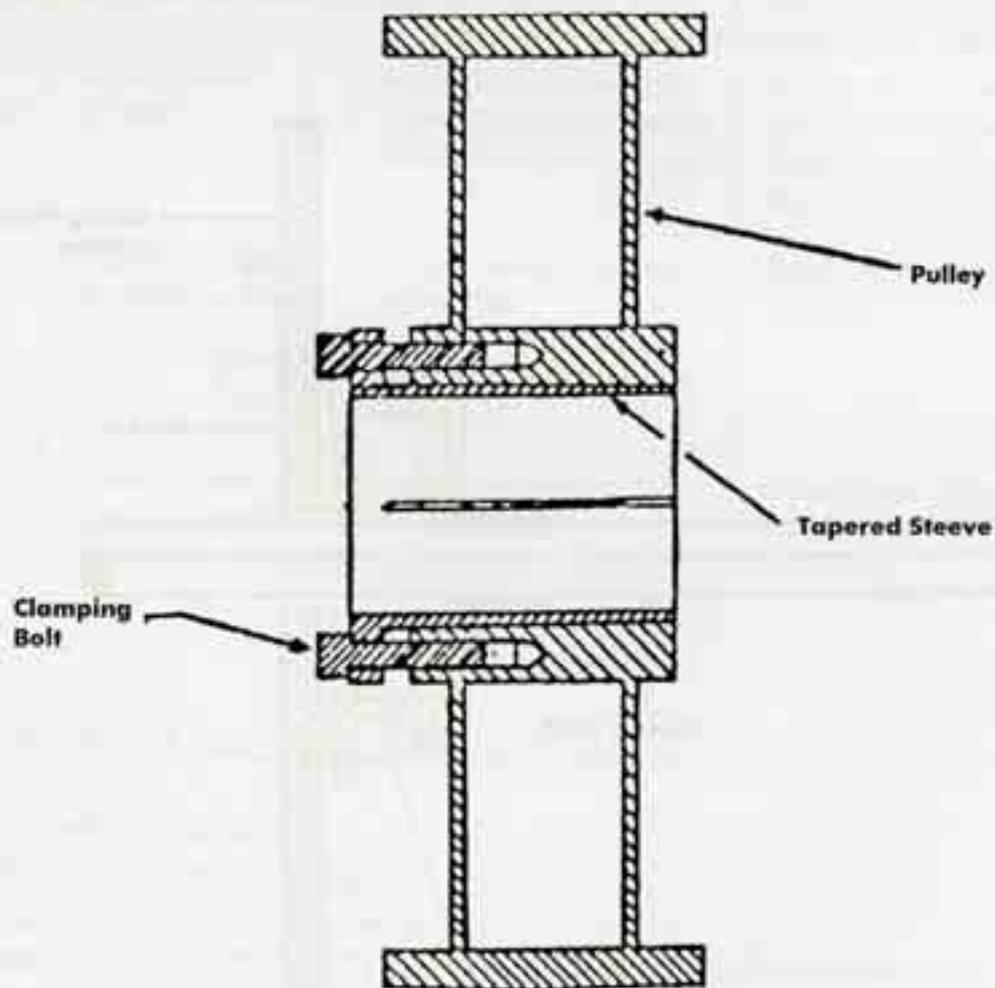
Tapered Locking Sleeve for Locking Pulleys and Runners to Shafts
